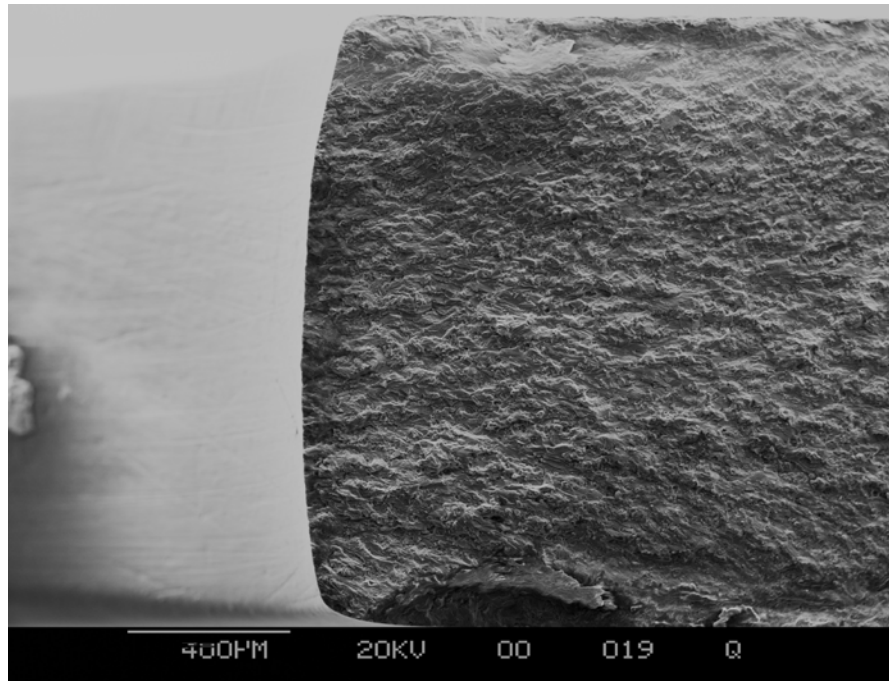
Fracture surface of specimen 13s showing crack initiation area
